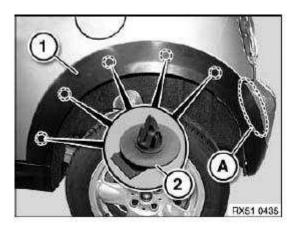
Identifying Trim And Clips Courtesy of BMW OF NORTH AMERICA, INC.
